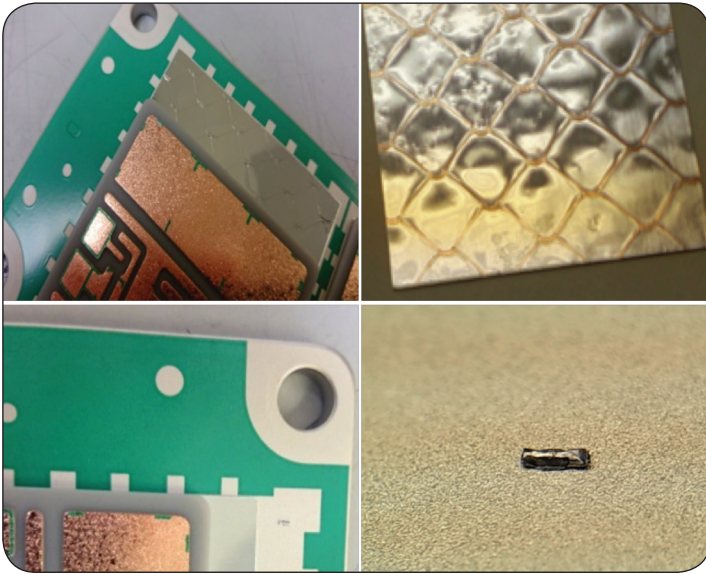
Assembly images showing sample soldered with metal mesh preform (top) and sample with wire bond spacer (bottom).
